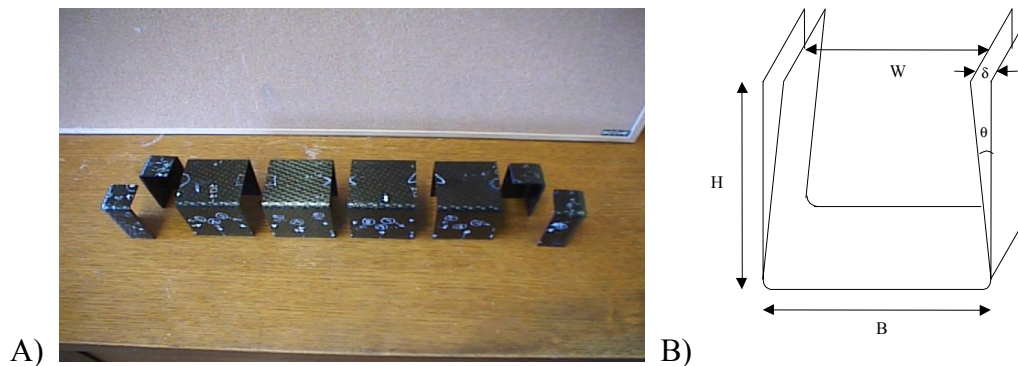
A) Sectioned rib, B) Definition of section geometry and spring-in.
